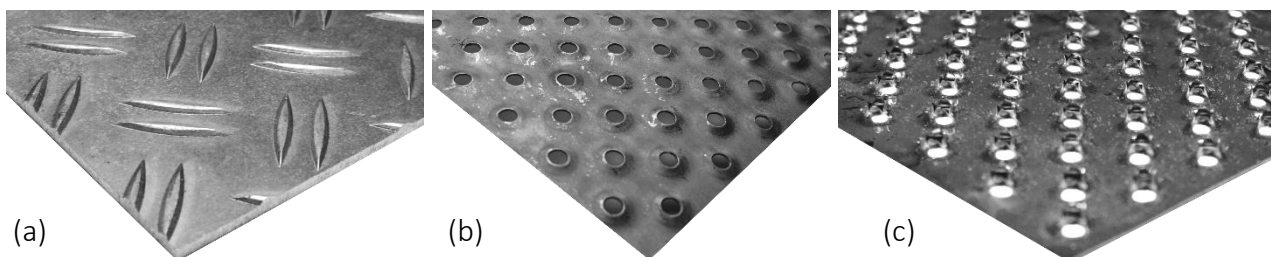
Sheet metals: (a) chequer plate (b) perforated sheet metal 1 (c) perforated sheet metal 2.
